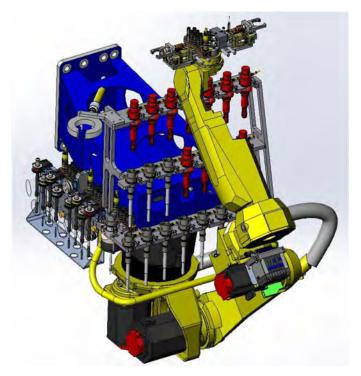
M10 robot with tool rack containing drill bits, hole probes and bolting anvils.
